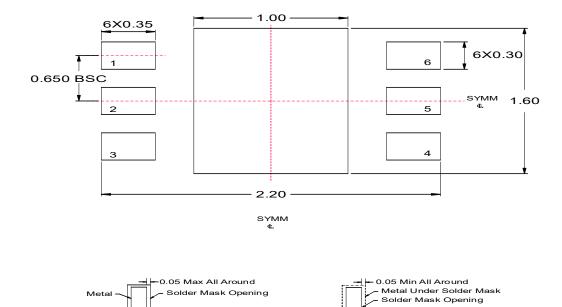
Recommended PCB Pad Layouts for DFN2×2-6L Package
